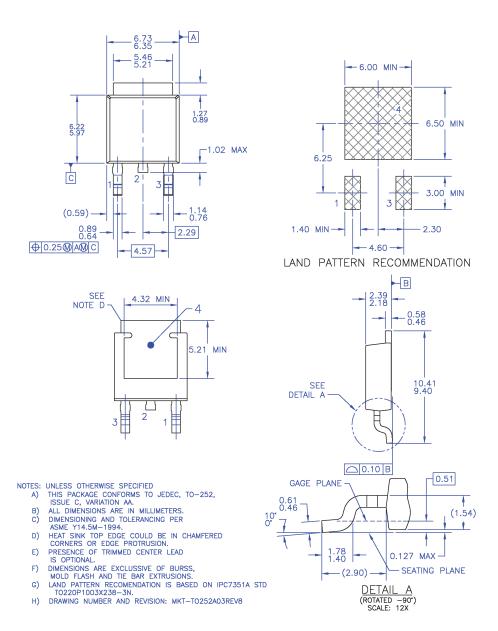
TO252 (D-PAK), Molded, 3 Lead, Option AA&AB
